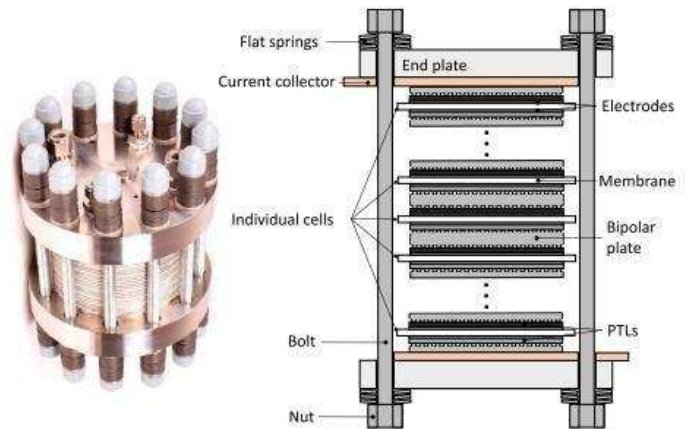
Parts of a PEMWE stack of the lower power class up to 100 kW [17]
